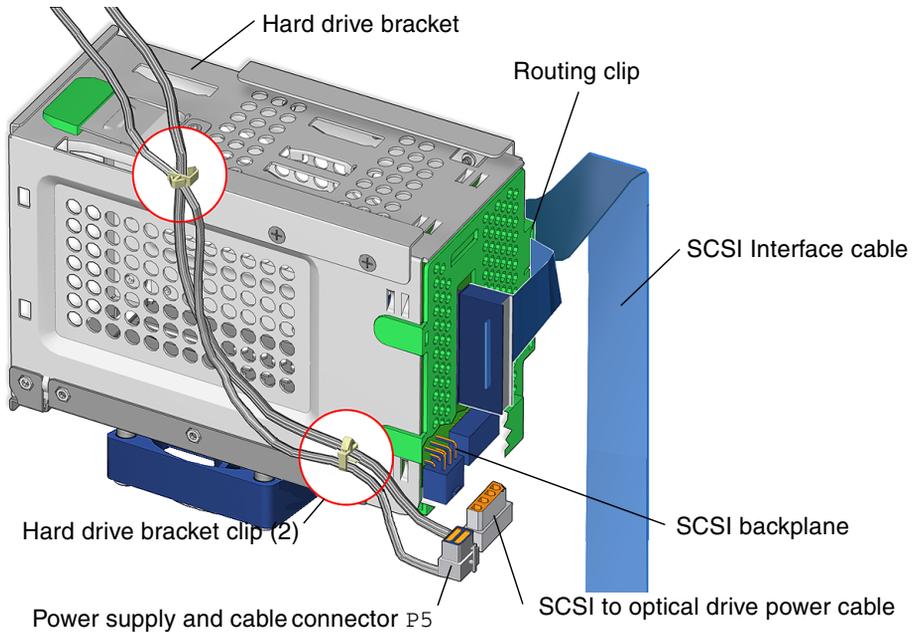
Installing the Power and Signal Cables for the Hard Drive Assembly
